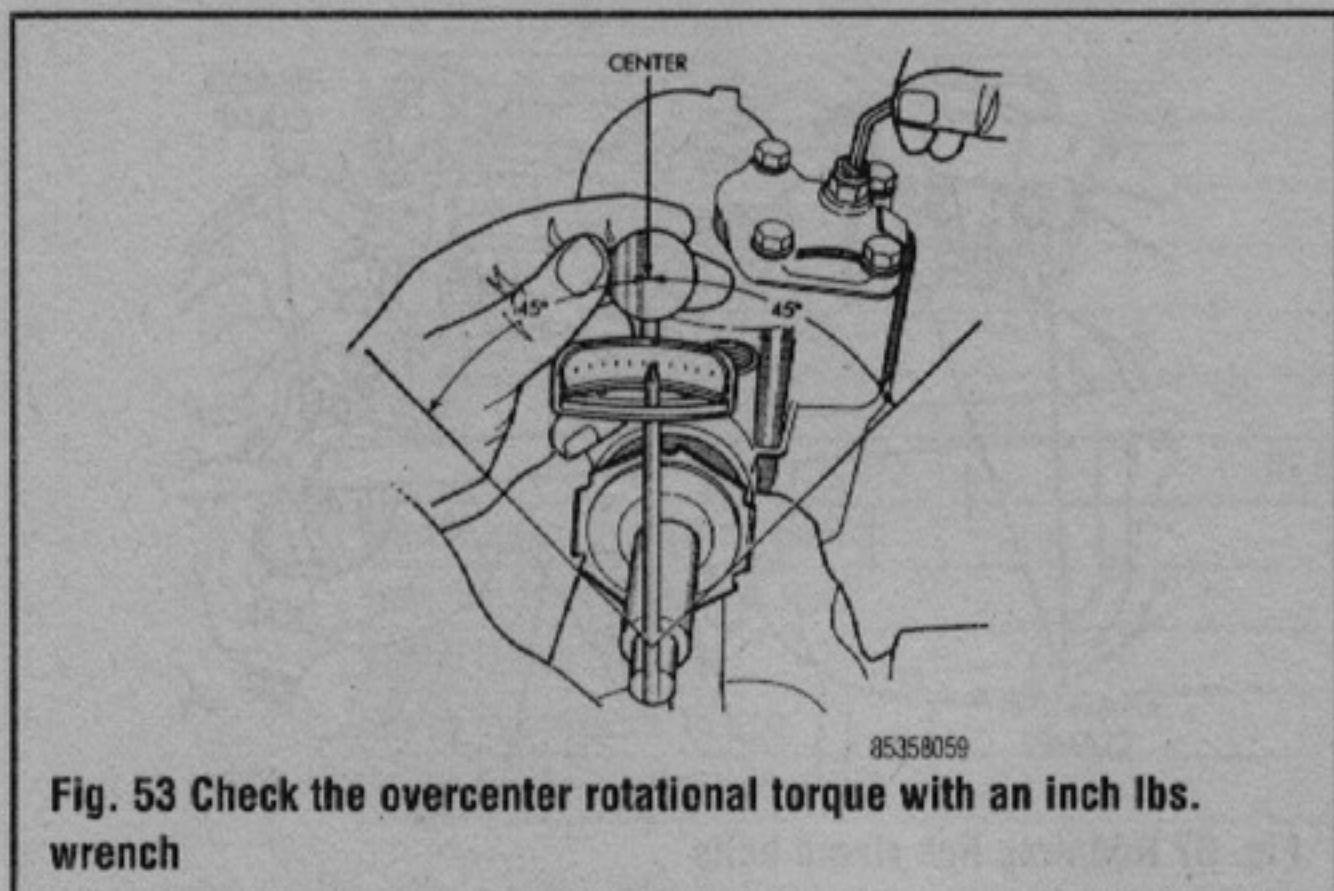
Check the overcenter rotational torque with an inch lbs. wrench
